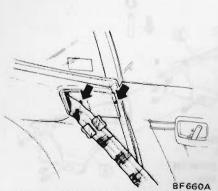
Removing shoulder belt (for GS30 2 + 2 seater models)
